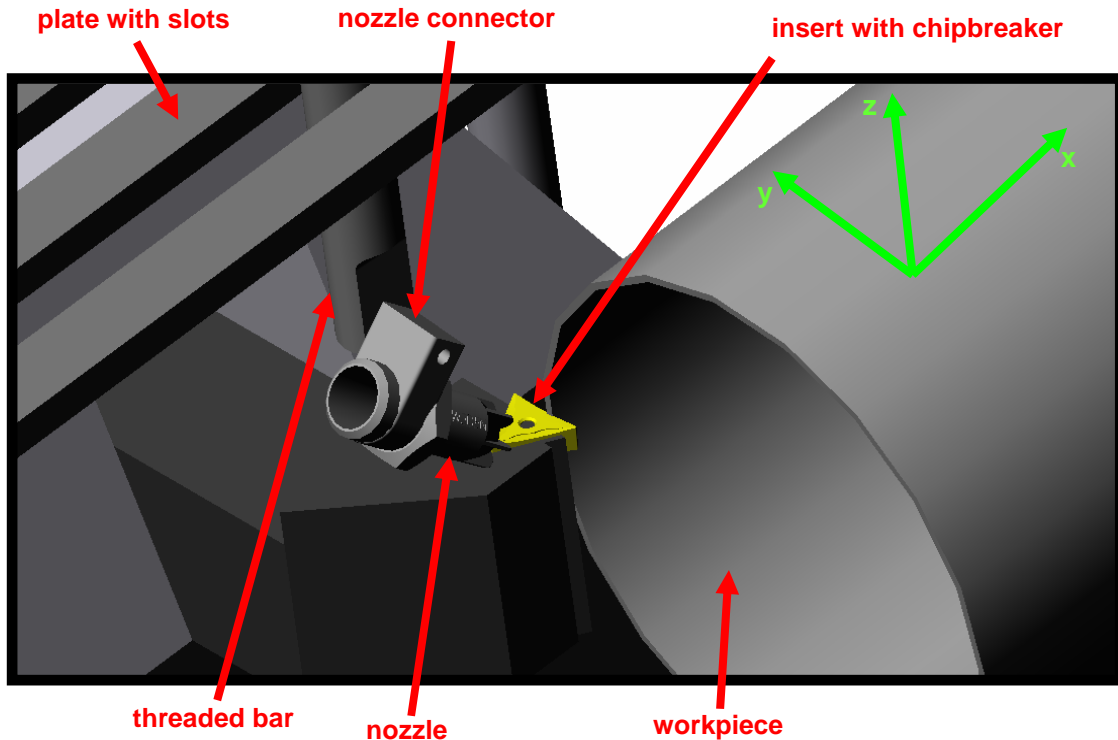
3D sketch of the cutting area: the insert with chipbreaker, nozzle and nozzle holder, workpiece and reference system aligned with cutting direction and feed
